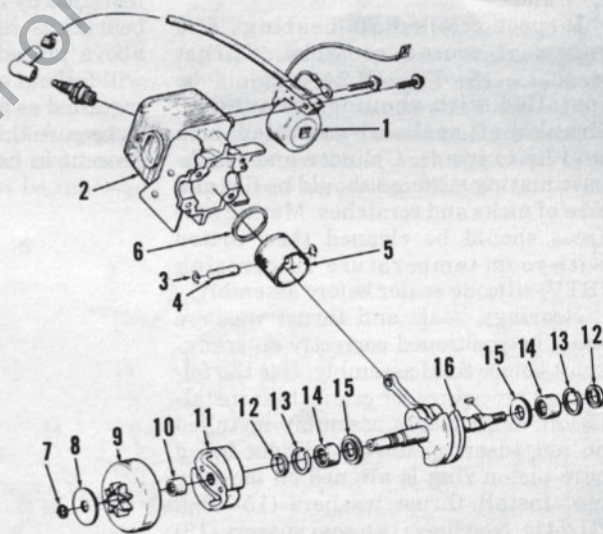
Exploded view of cylinder, crankshaft and clutch assemblies.
